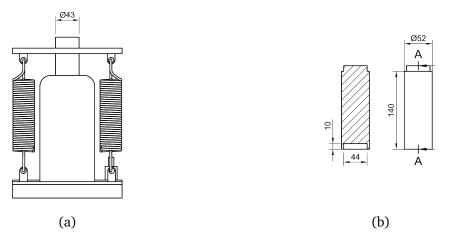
Mockup of hydraulic jack with springs (a) and stacking piece to extend the hydraulic jack (b).
